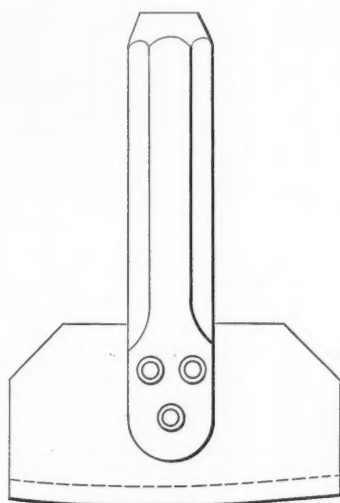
Type of Tool used to set the finished dummy strips in the gland case
